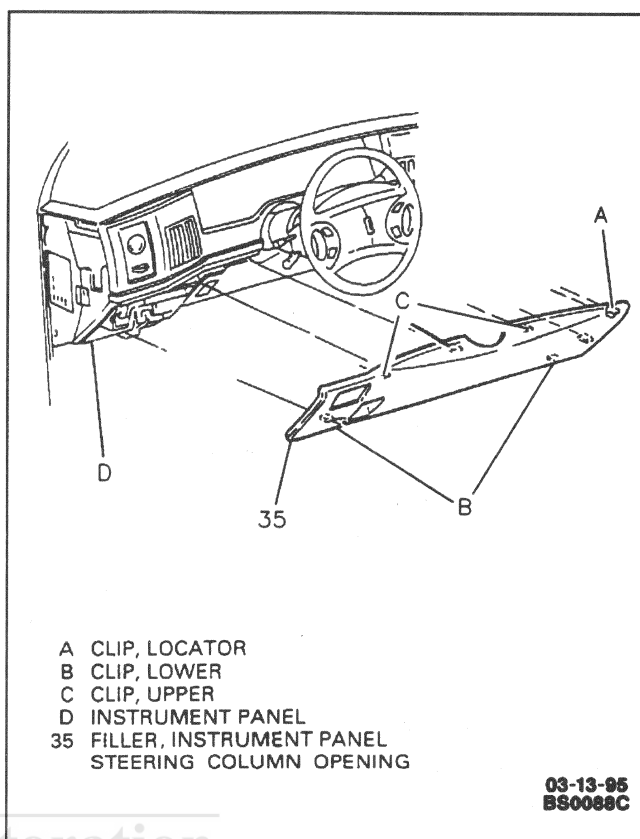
Instrument Panel Steering Column Opening Filler - (Buick)
